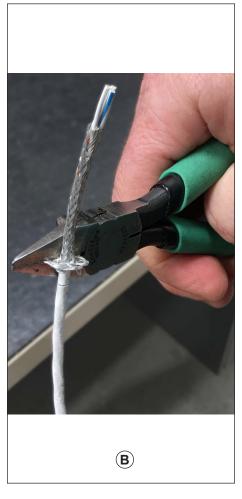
Removing outer jacket & braided shielding (wiring shown is typical)
